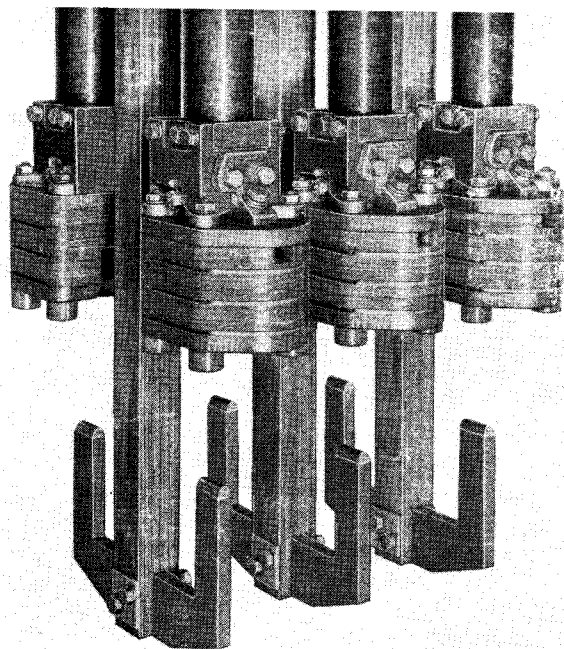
Type B-22-B 600-Ampere, 13,800 Volt Breaker Contact Assembly with "De-ion Grids"
